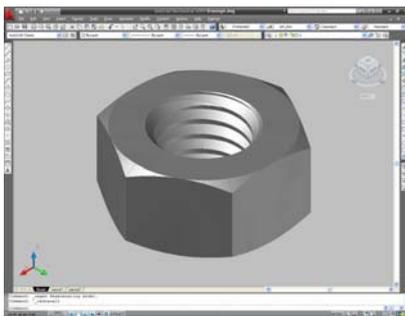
The final appearance of the nut M8 component with assigned material-stainless steel
